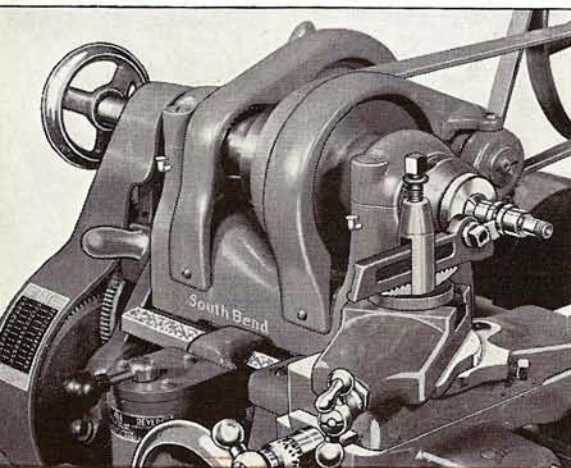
Machining Small Part Held in Hand Wheel Collet Chuck Attachment.
